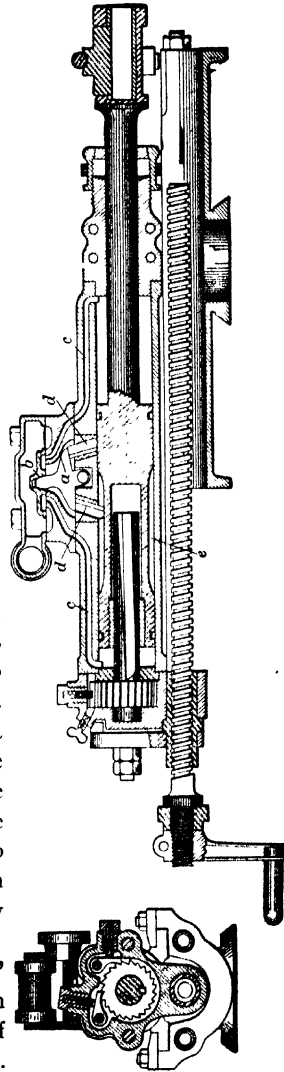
Murphy "Little Champion" Drill. Wickes Machinery Co.
